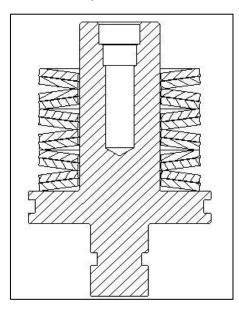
Disc springs installed on Failsafe Emergency brake piston.
